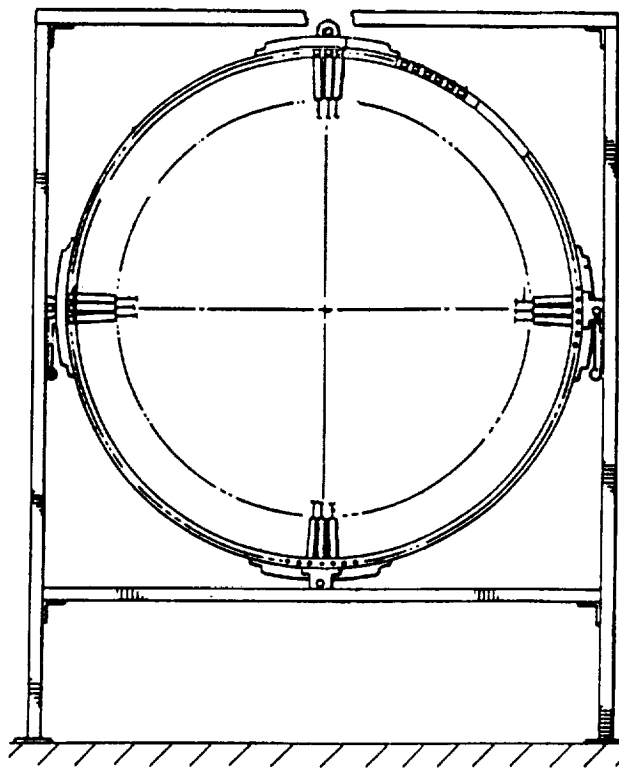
ARC CIRCULAR BRAIDING MACHINE
